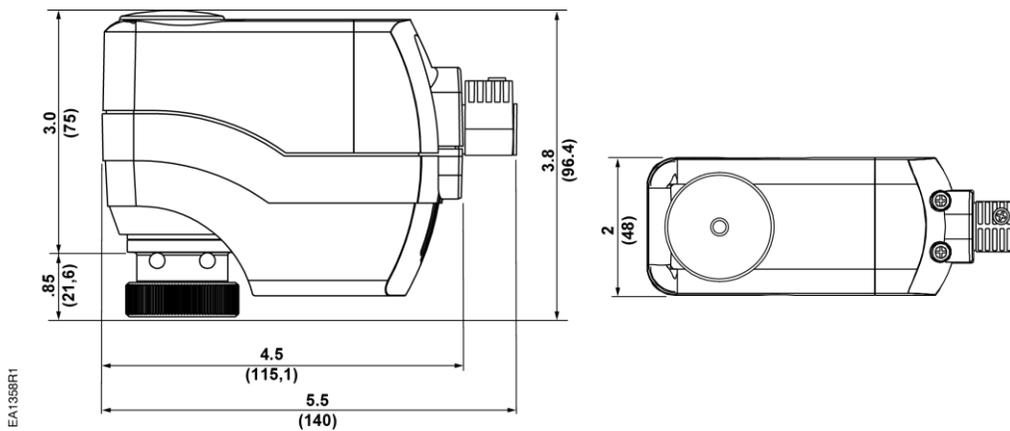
SSD61.5U/SSD81.5U Actuator Dimensions in Inches (Millimeters).
